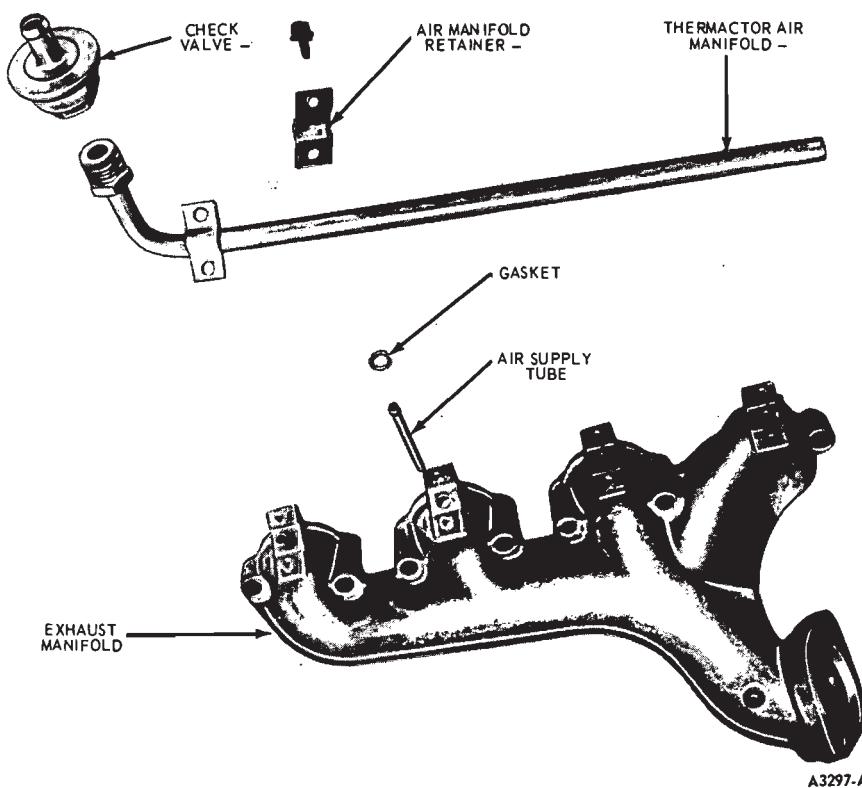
Exhaust Manifold and Related Thermactor Parts—429 BOSS
